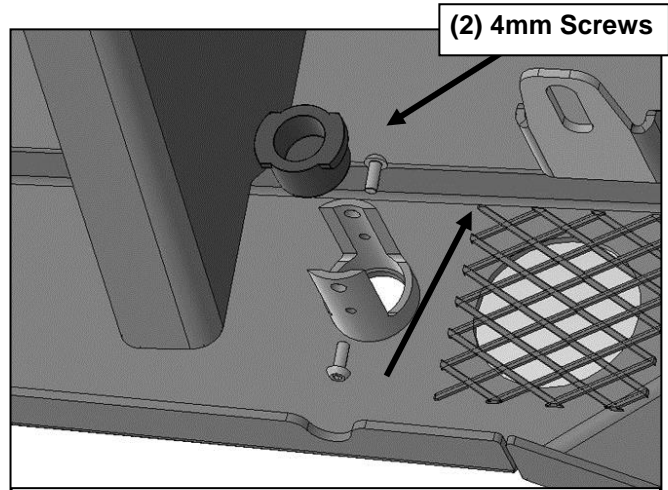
Remove sensors, wire harness, license plate lights, trailer plug and spare tire access lock (pictured) if equipped
